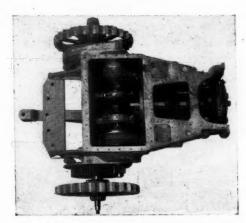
EXPOSED VIEW OF THE DRIVE MECHANISM OF A TRACK TYPE TRACTOR
